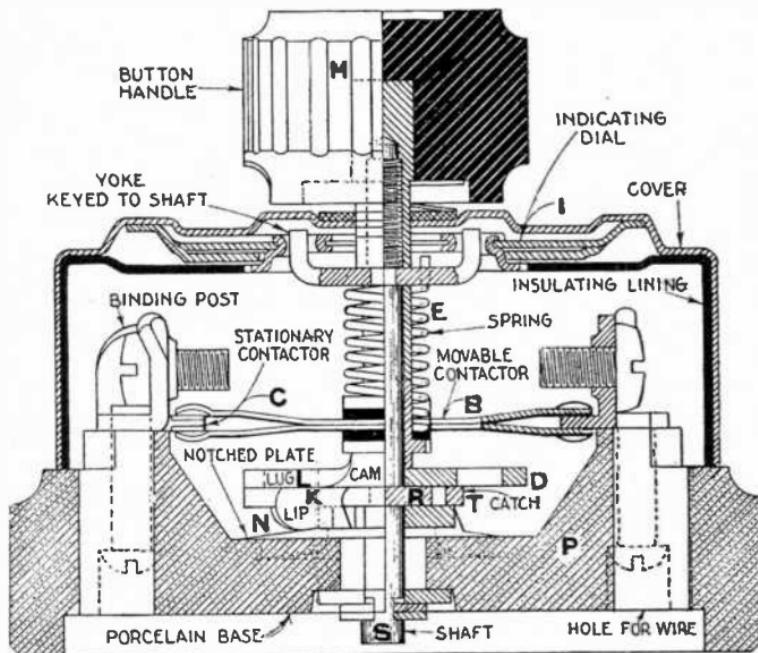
,068.—Arrow rotating button snap switch; sectional view showing mechanism.
